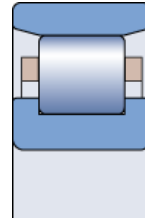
Cross-sectional view of a cylindrical roller bearing of 'N' type specification - (SKF, 2016)
